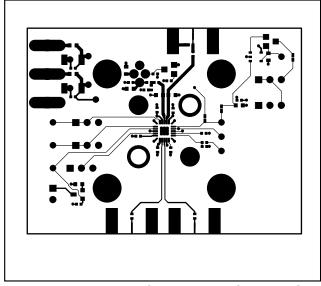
MAX3996 EV Kit PC Board Layout—Component Side
